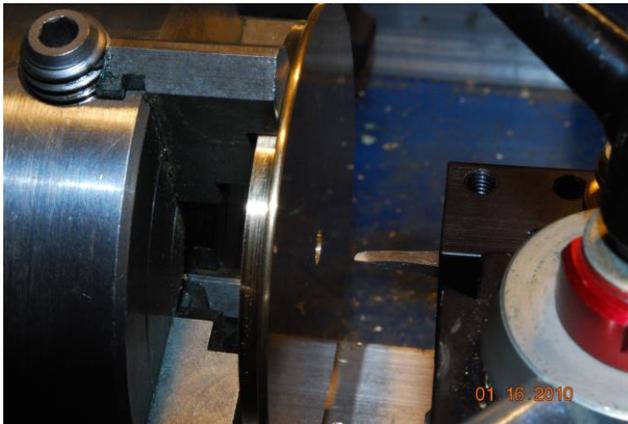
Hold the flange by the shoulder in a 4-jaw chuck. A small boring bar is used to enlarge and center the hole.
